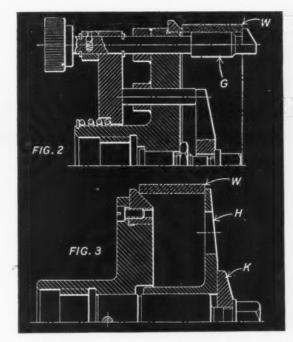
Chuck for clamping thin-walled tubes for external machining operations. Fig. 3. Another chuck for clamping tubes for external roughing operations
